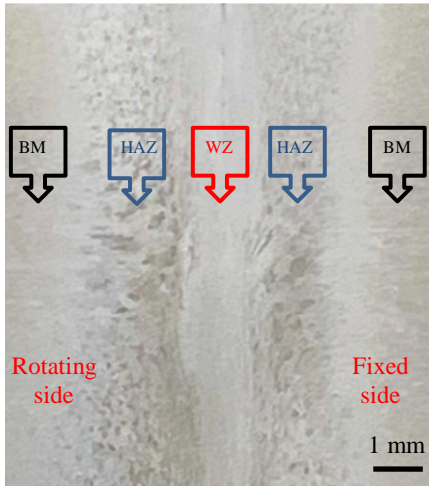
Macro-structure of the welding joint for AA 6061
